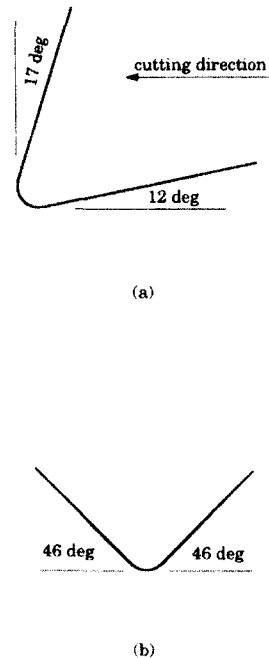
Tool tip for (a) cutting cast iron, (b) sliding over glass
